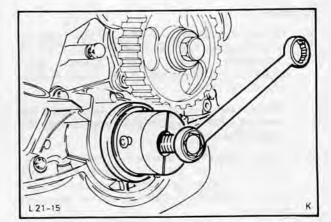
Pull off crankshaft pulley using Special Tool 21-028
